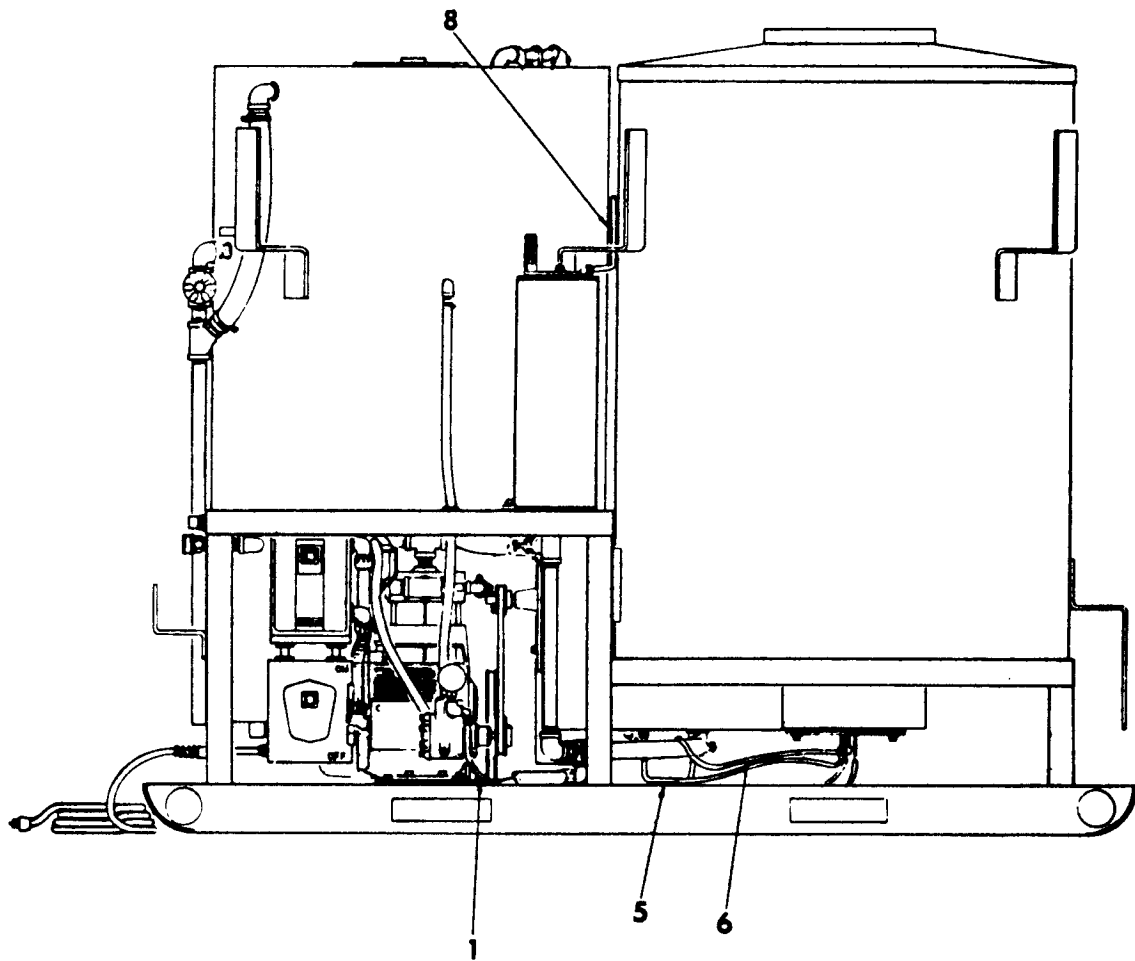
Unit assembly, copper tubing (sheet 1 of 2).
